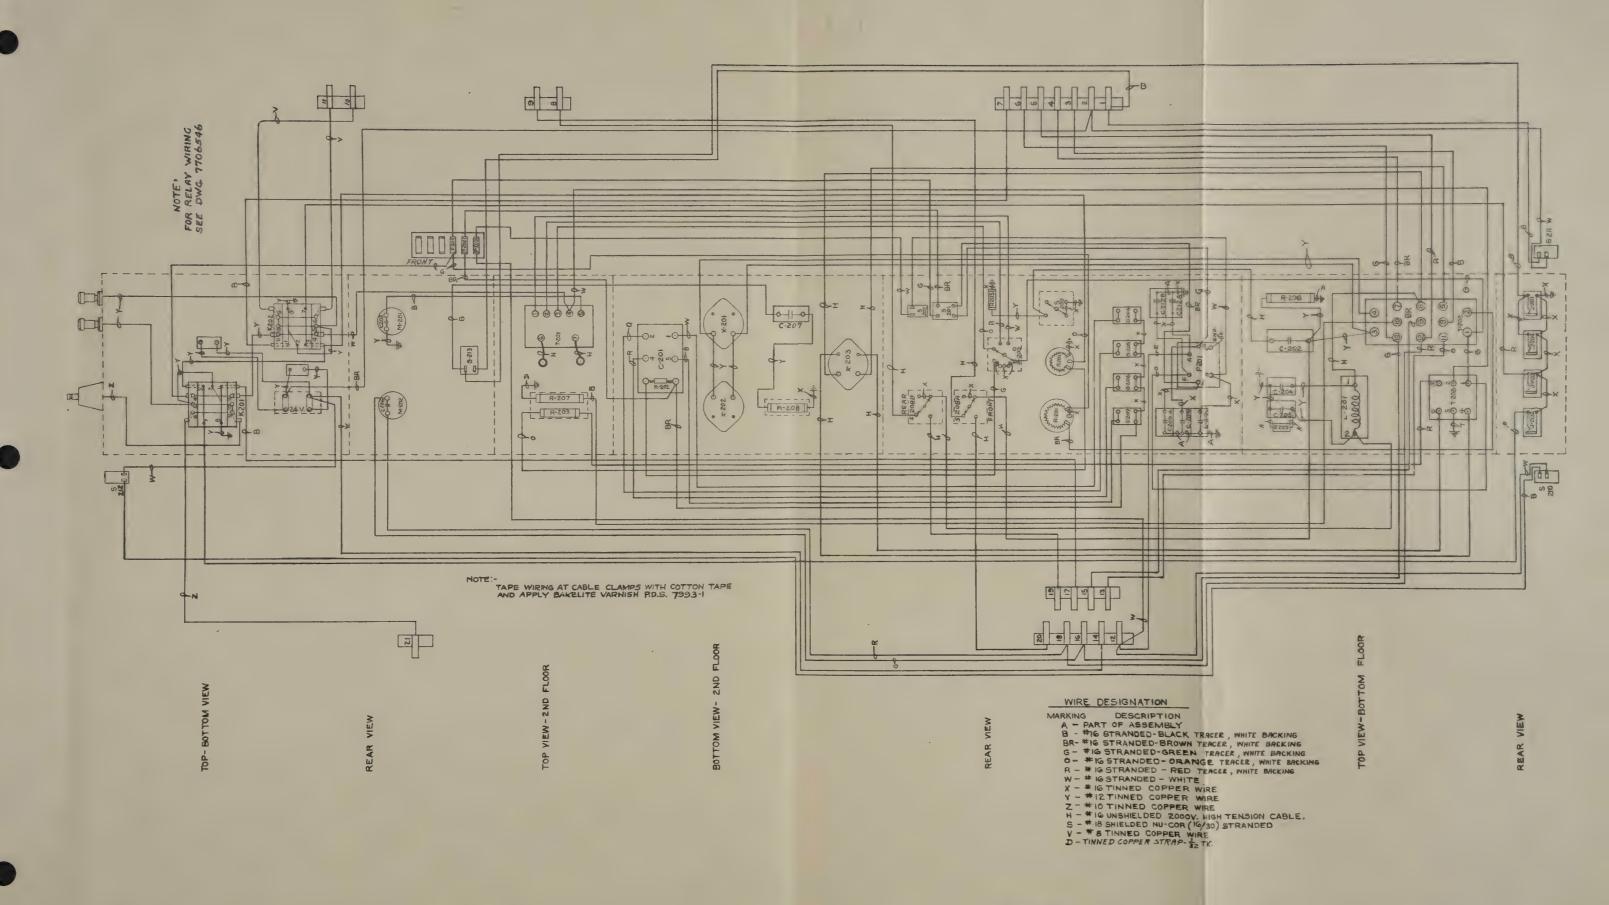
Rectifier Unit, Type CAY-20103, Wiring Diagram (Drawing T-7607249).
